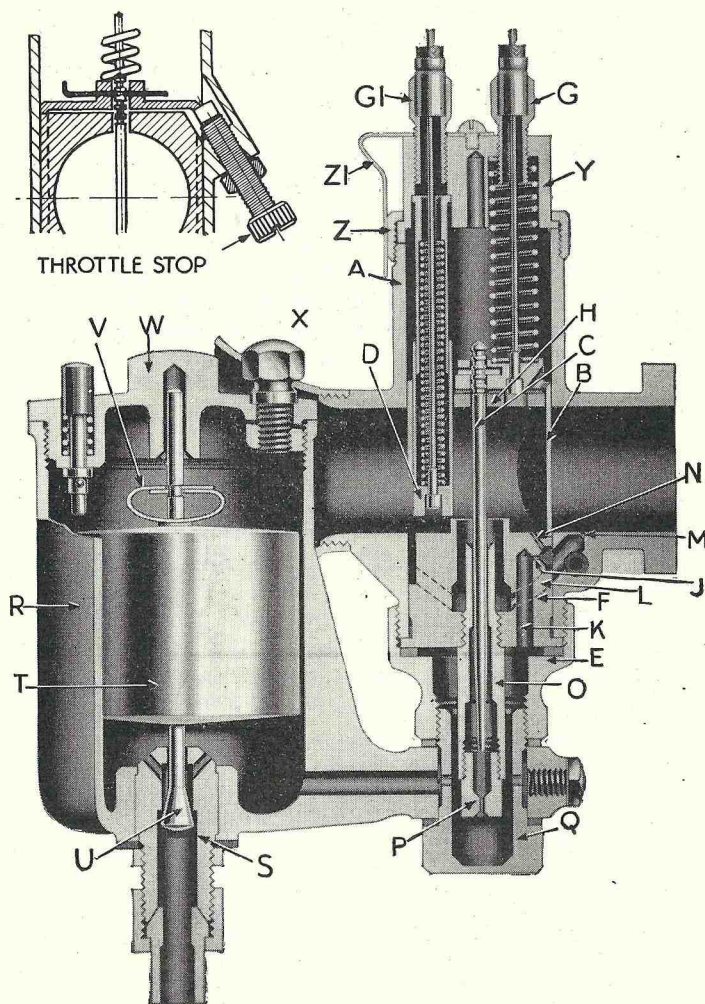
SECTIONED ILLUSTRATION OF THE AMAL NEEDLE JET CARBURETTOR, FOR SINGLE- AND TWIN-CYLINDER MODELS.
